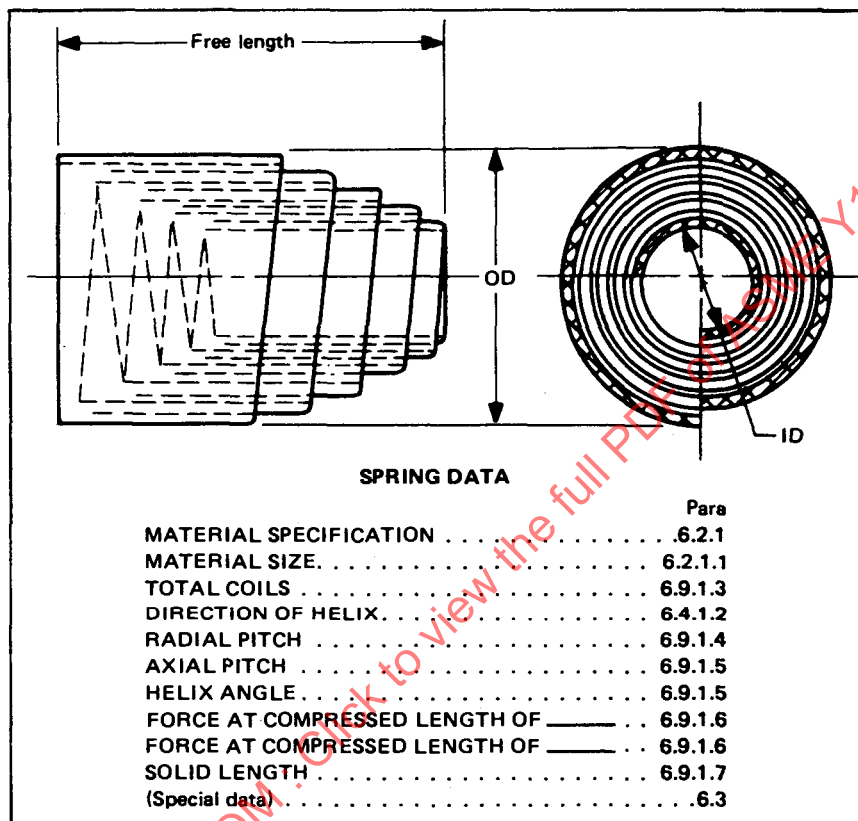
DRAWING REQUIREMENTS FOR VOLUTE SPRINGS
